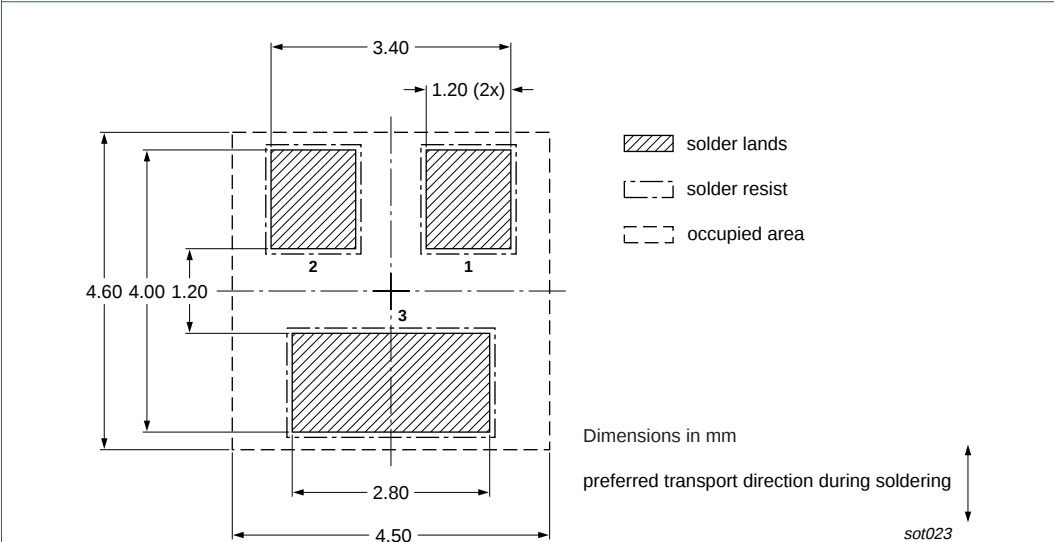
Wave soldering footprint SOT23 (TO-236AB)
